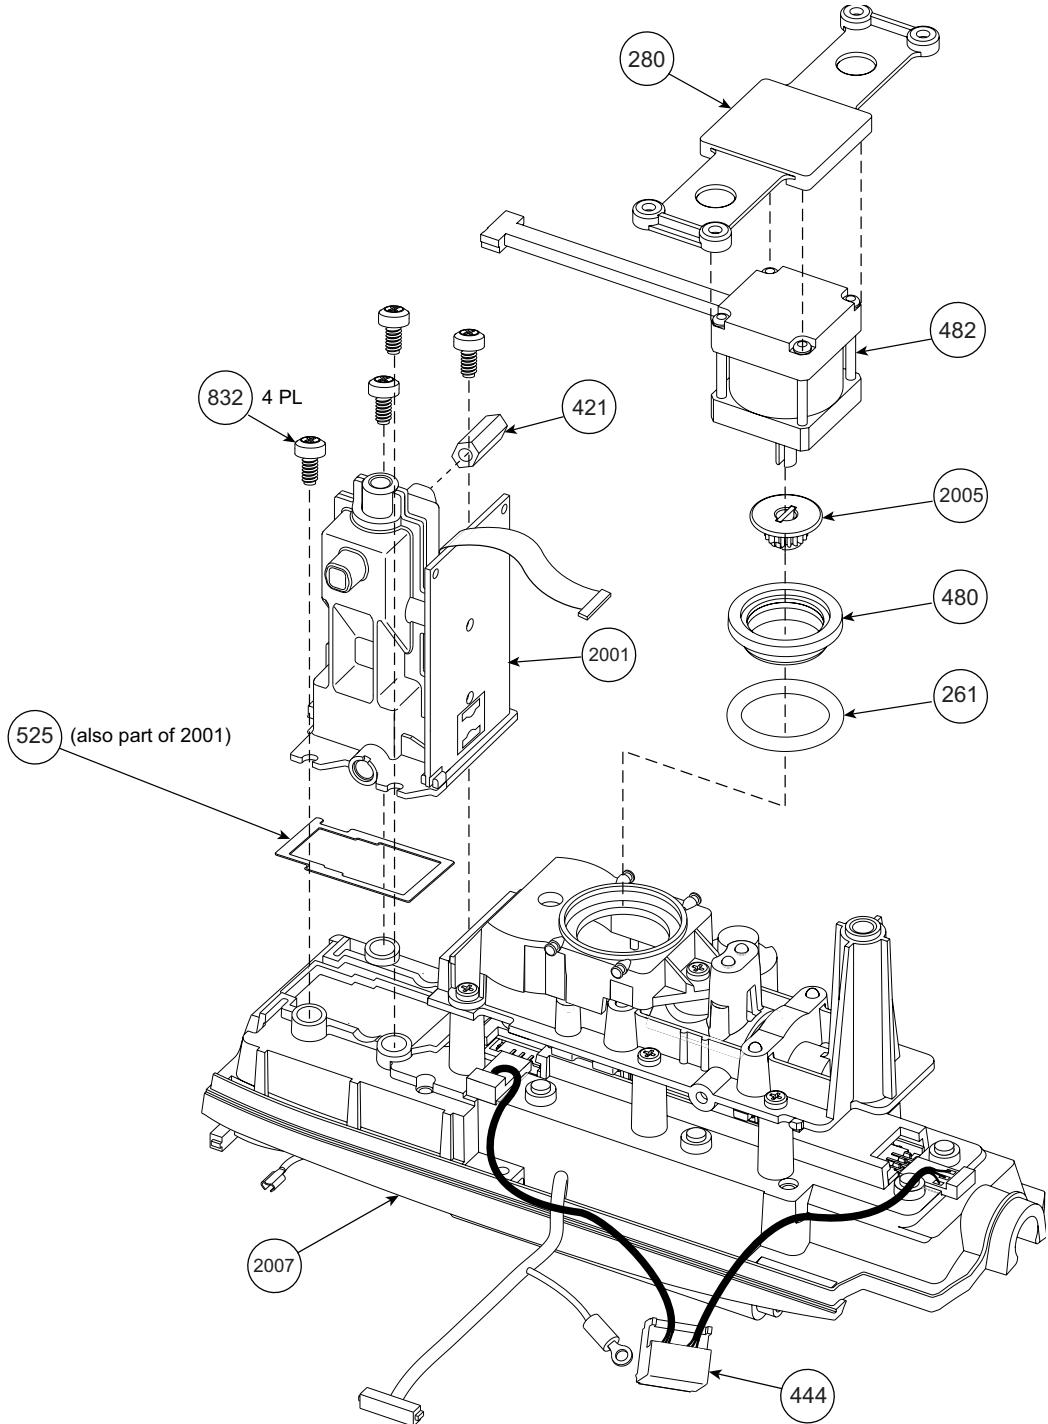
Model 8100 - Motor and AIL Sensor Assembly
